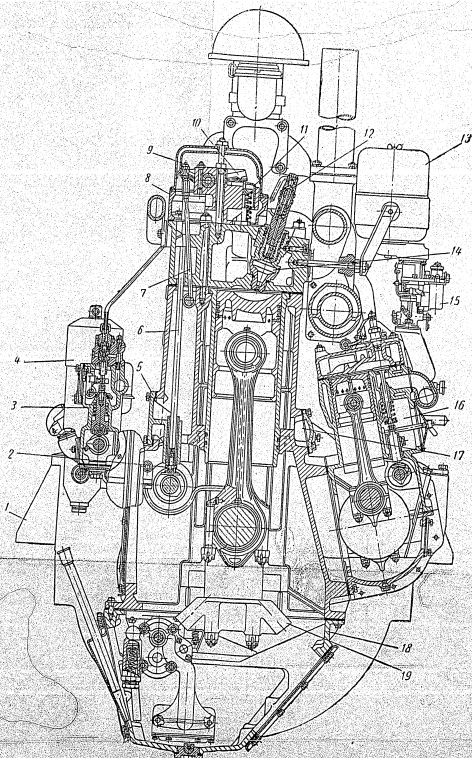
Lateral Section of the KMM-46 Diesel Engine:
